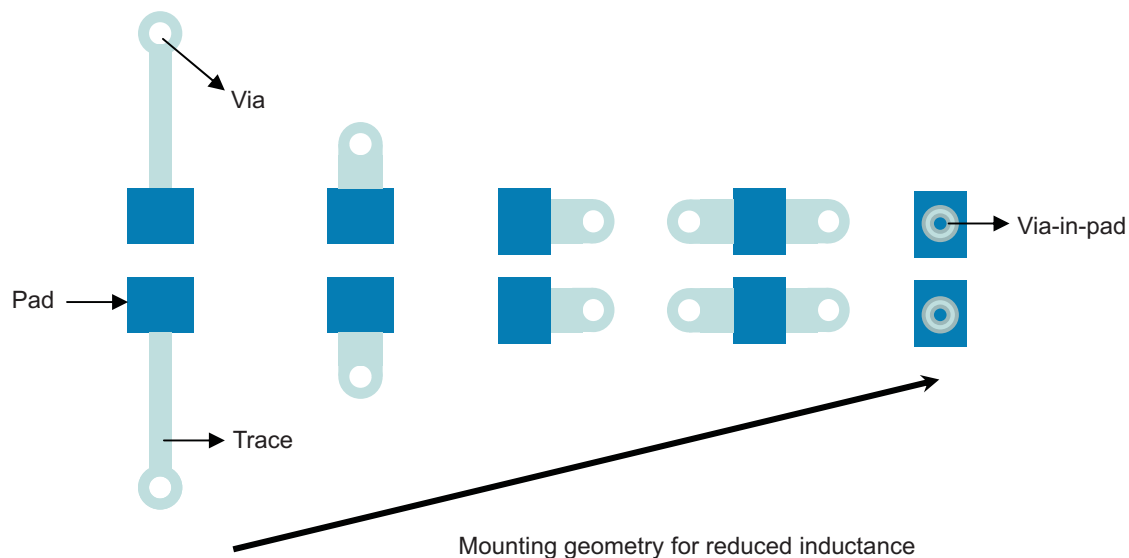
Capacitor Placement Geometry for Improved Mounting Inductance
